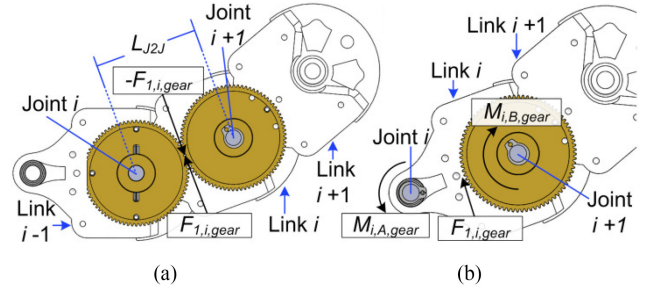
R3RT gear model. (a) Gear pair illustration. (b) Joint moments due to gear force.
